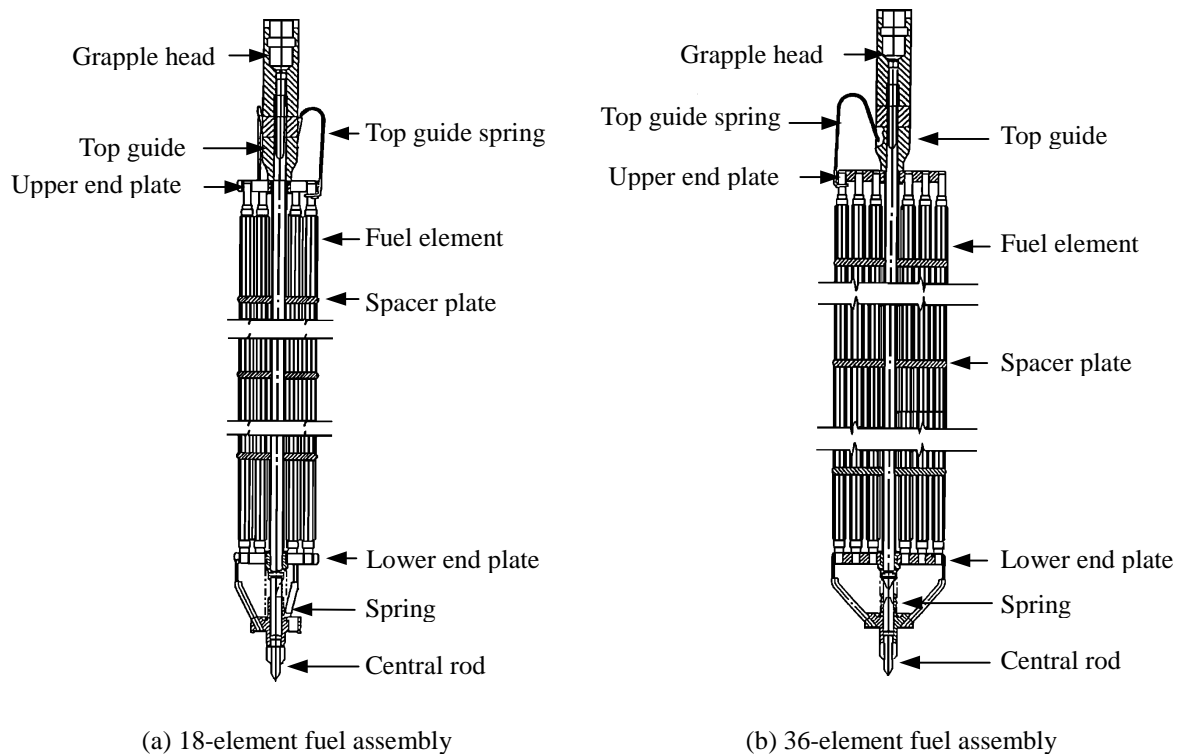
Schematic diagrams of the HANARO fuel assemblies (length: 0.96m)
